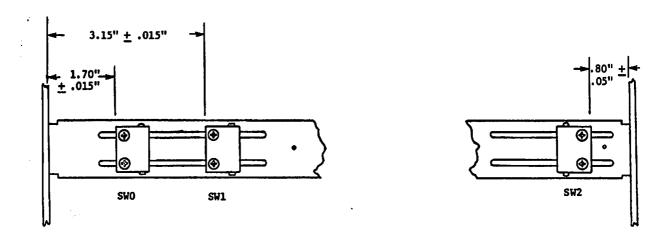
REED SWITCHES AND MOUNTING BRACKET
